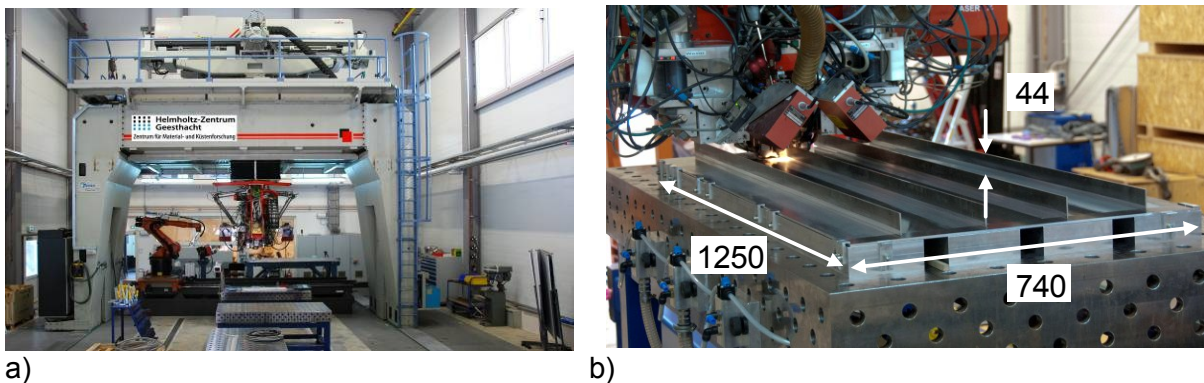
(a) Large scale laser beam welding facility of the Helmholtz-Zentrum Geesthacht and (b) welded demonstrator panel from aluminium alloy AA2198.
